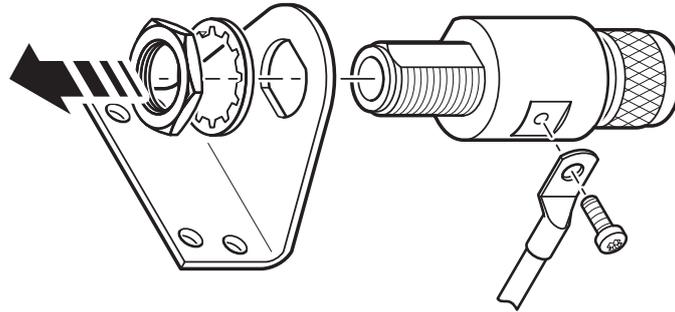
Assembly of the MBG-S-PRO Surge Protector
